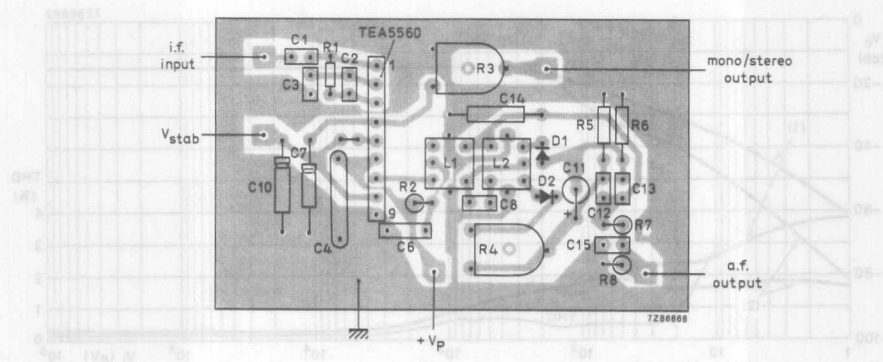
Printed-circuit board component side, showing component layout. For circuit diagram see Fig. 2.
